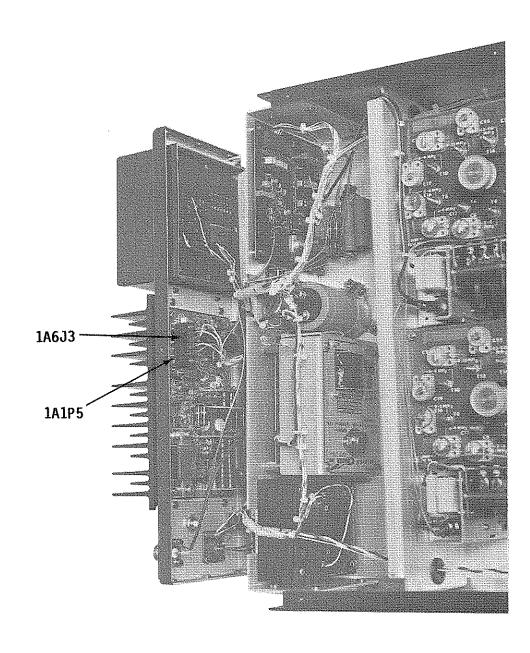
SHEET 3 of 19, POWER AMPLIFIER DISASSEMBLY
